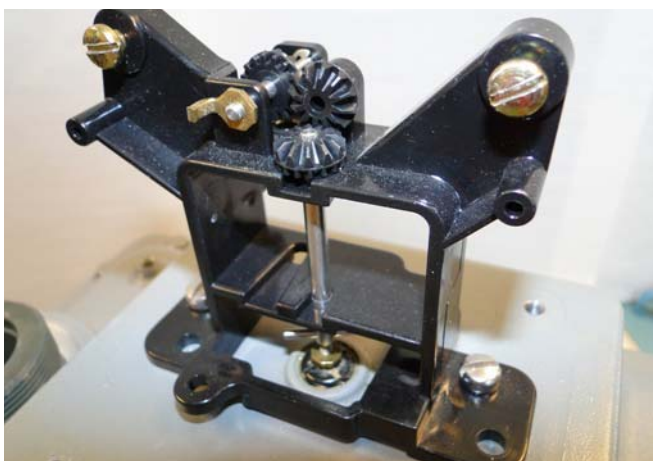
6. Front View of Supported Index Bracket with Index Removed
